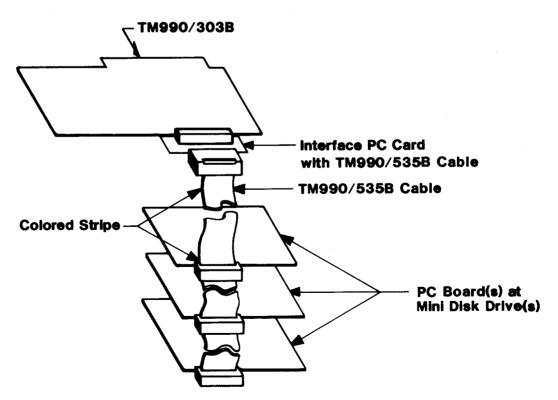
TM 990/535B CABLING BETWEEN CONTROLLER AND MINI DISK DRIVES
